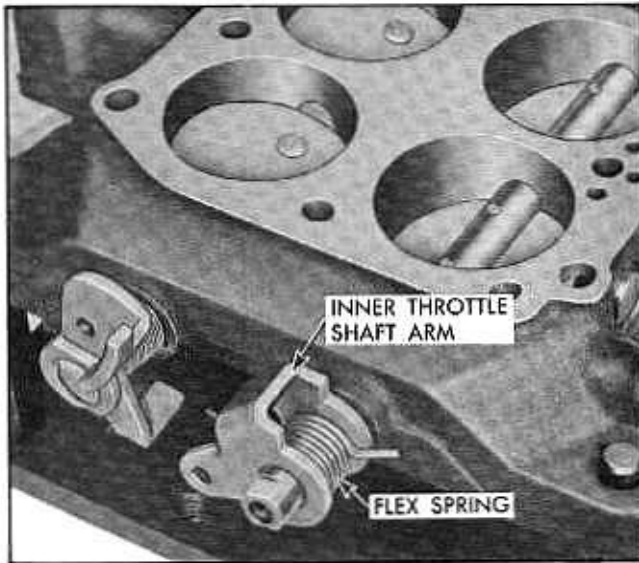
B-20 Inner Throttle Shaft Arm Installed
